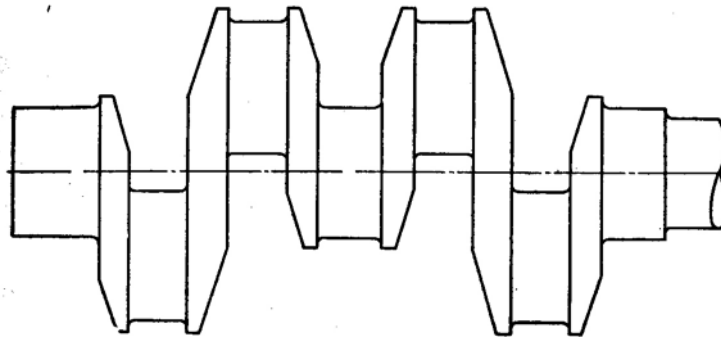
Crank shaft of Volkswagen Four cylinder-opposed engine
